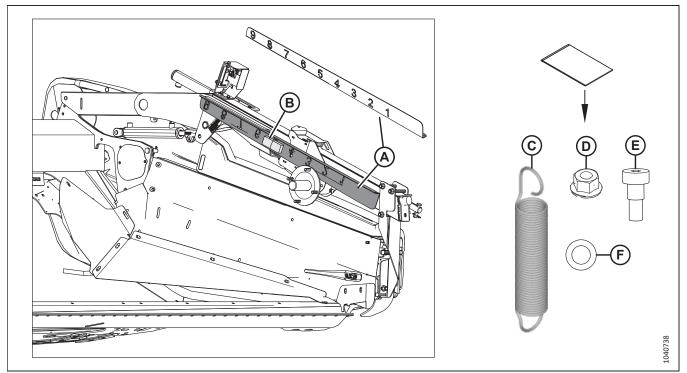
Fore-Aft Indicator Shipping Location, Parts Bag MD #368002
